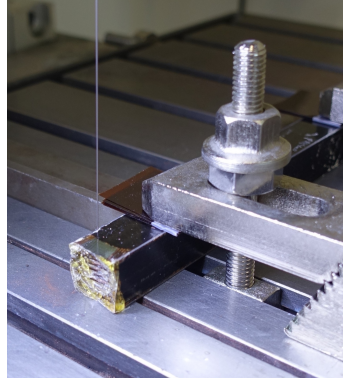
Impregnated cable ten-stack mounted on the table of the diamond wired cutting machine.
